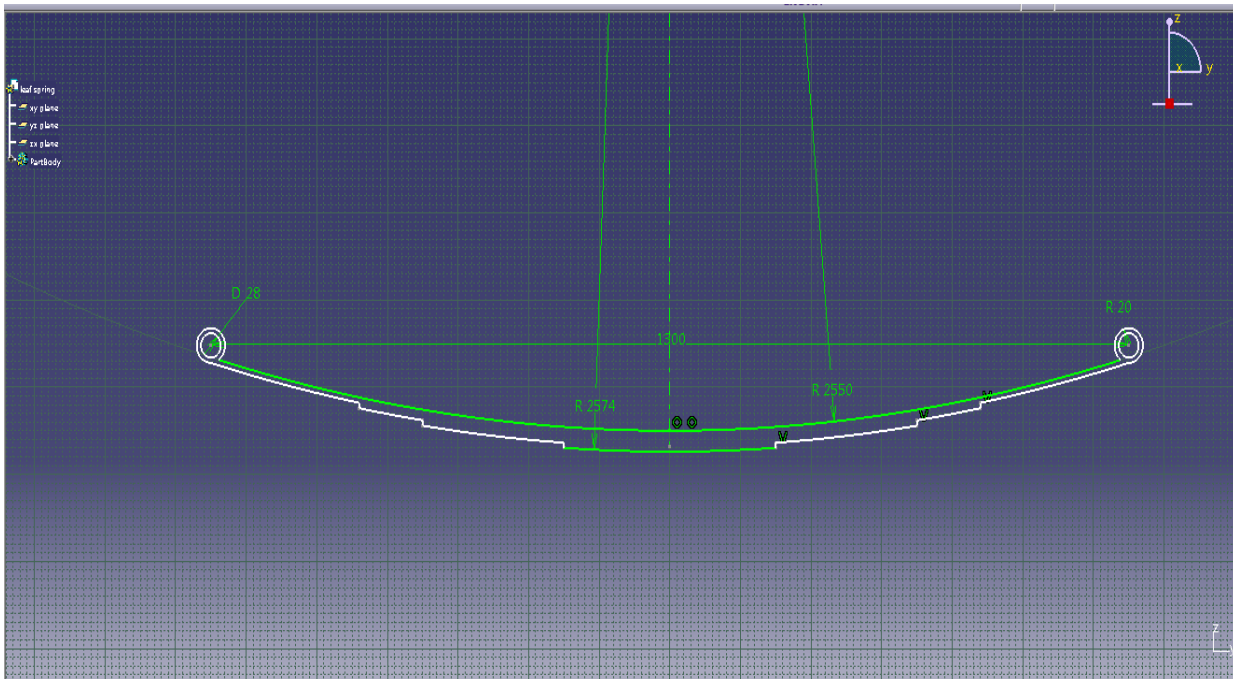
2D drawing of laminated steel leaf spring using CATIA V5 R19.
